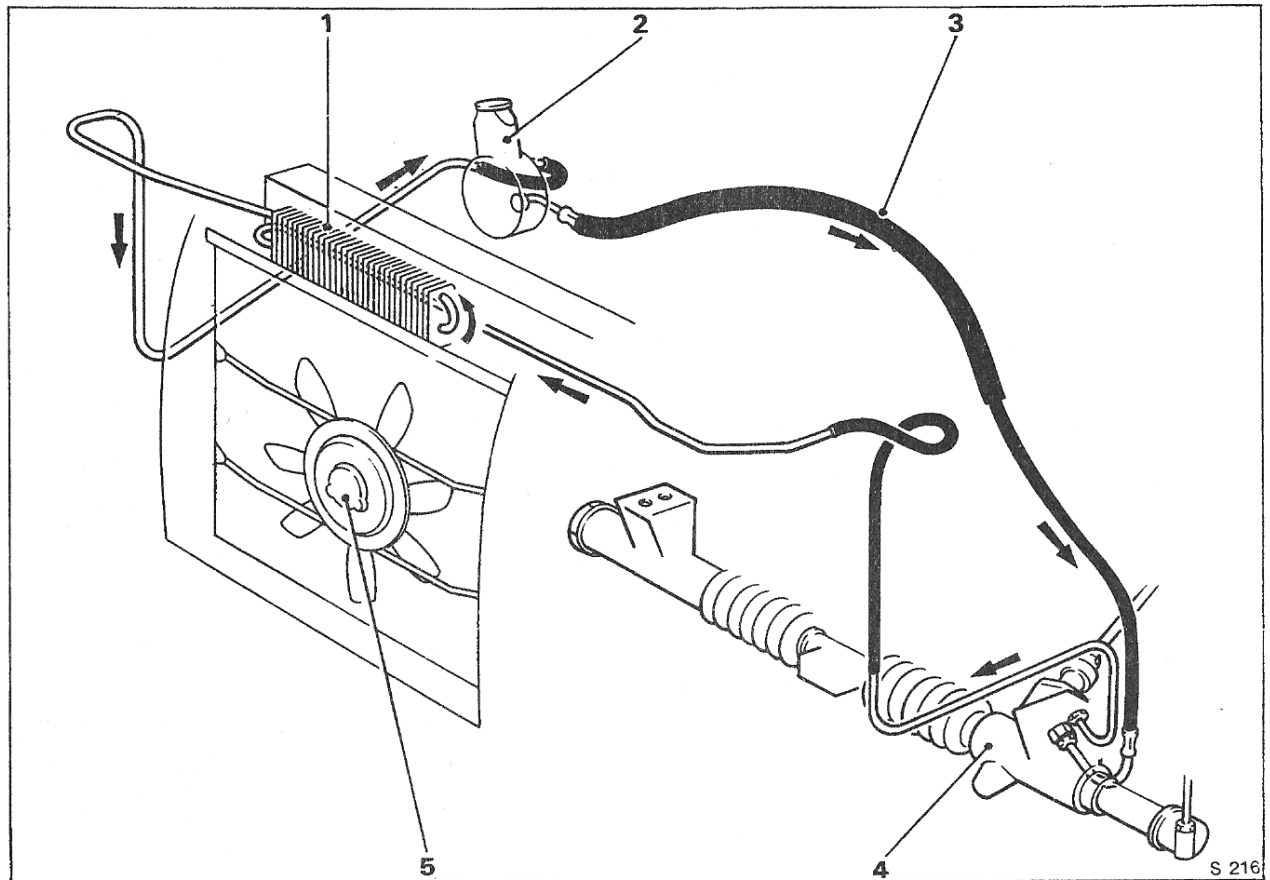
Hydraulic pipe runs. Left-hand drive car
